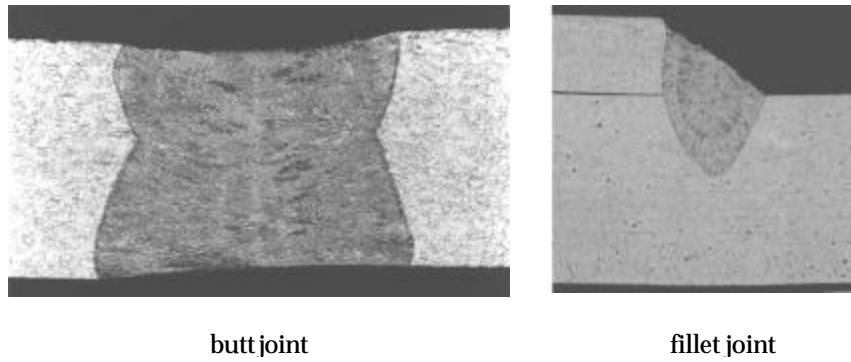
Macro Cross Section of both Butt and Fillet Welds
